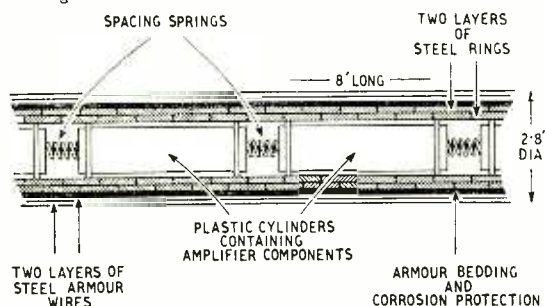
Longitudinal section showing construction of American-type flexible repeater built into the main transatlantic run of the cable.
